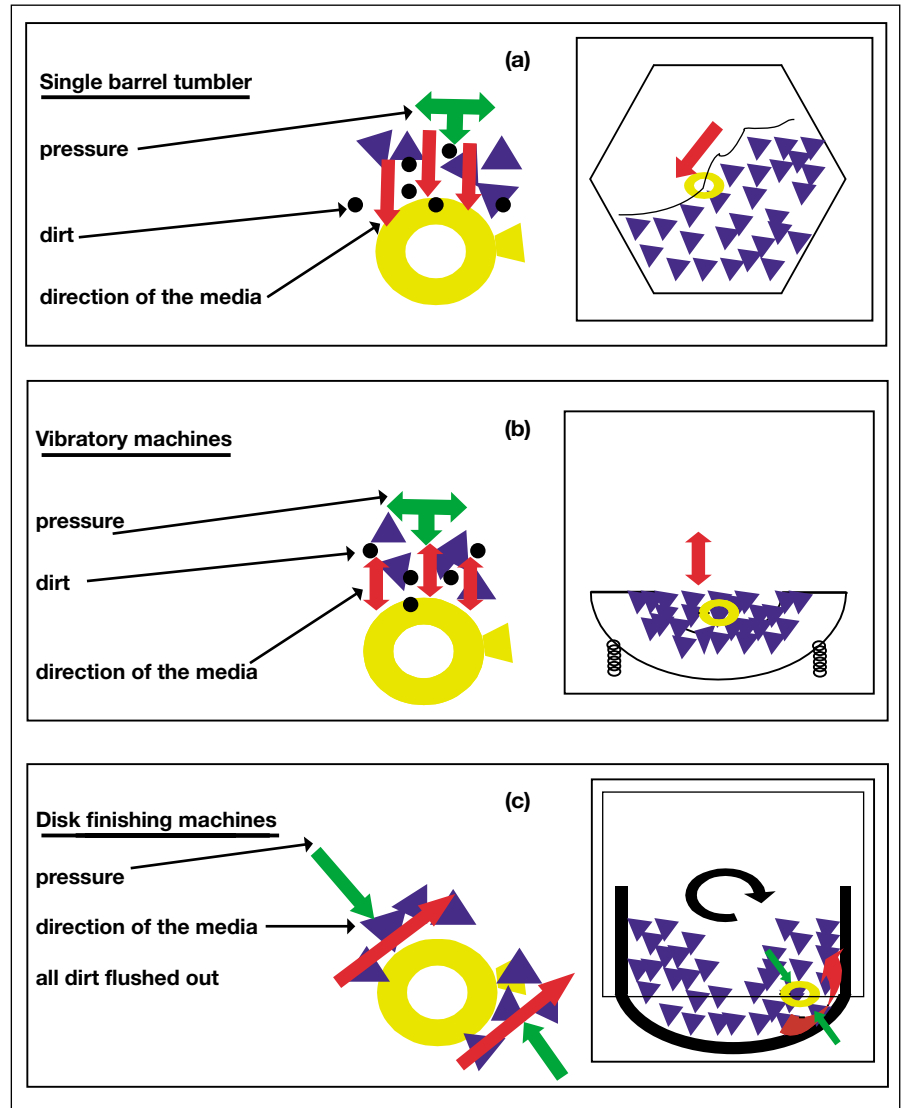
Schematic: Polishing action of (a) Single barrel tumbler (b) Vibratory machine (c) Disc finishing machine
